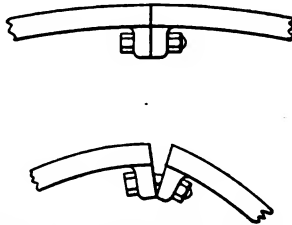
Manner in which Bolts in Fly-wheel Joints are Stressed
